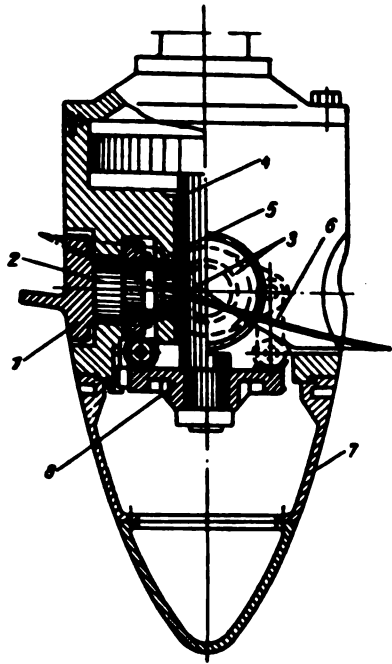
Blade-actuating mechanism with crank drive
